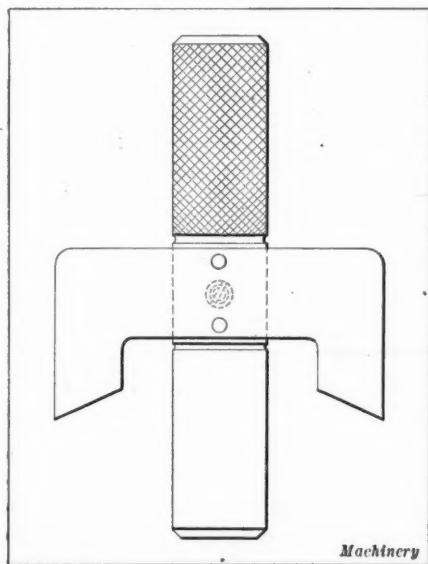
Combination Plug and Templet Gage for inspecting Bevel Gear Blanks
